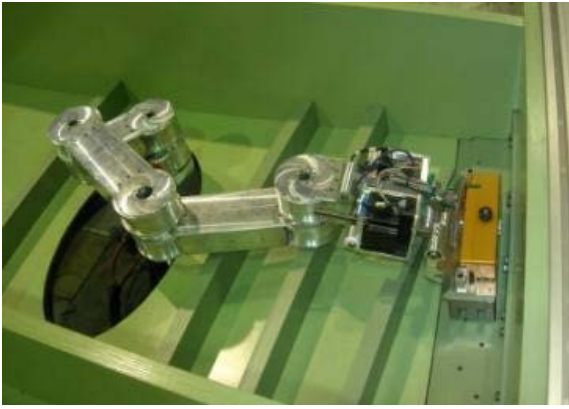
Prototype Deployable Arm Robot (DAR) positioning steel backing plate inside wing box.
